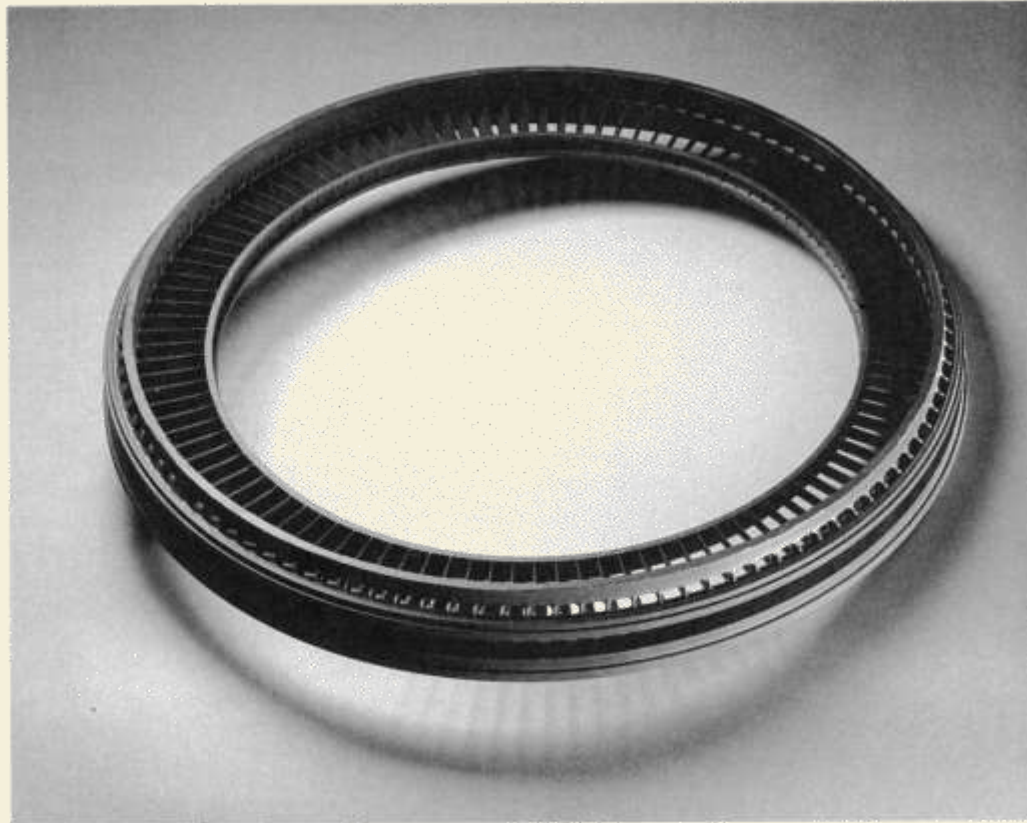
9 A one-piece compressor stator with 108 separate airfoils made by investment casting (photo courtesy of Howmet Corp.).
